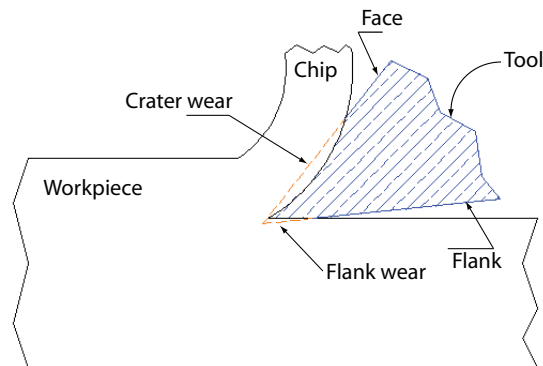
Several areas of the cutting tool that present wear during the metal cutting process.
